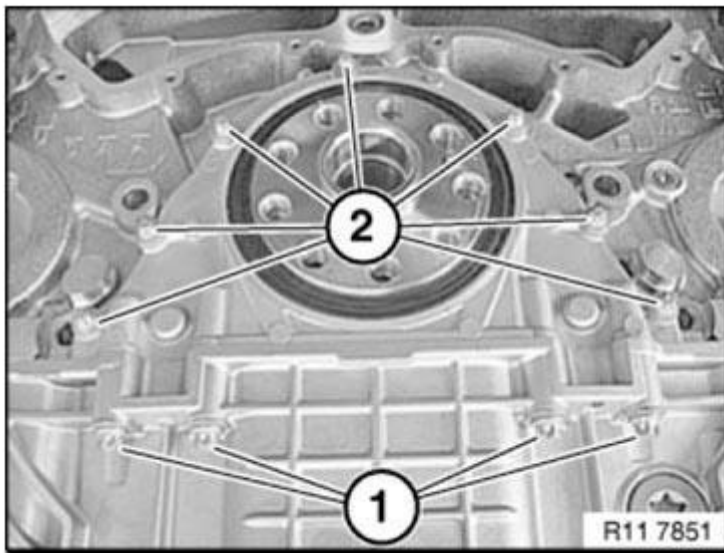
Identifying Radial Crankshaft Seal End Cover Screws
